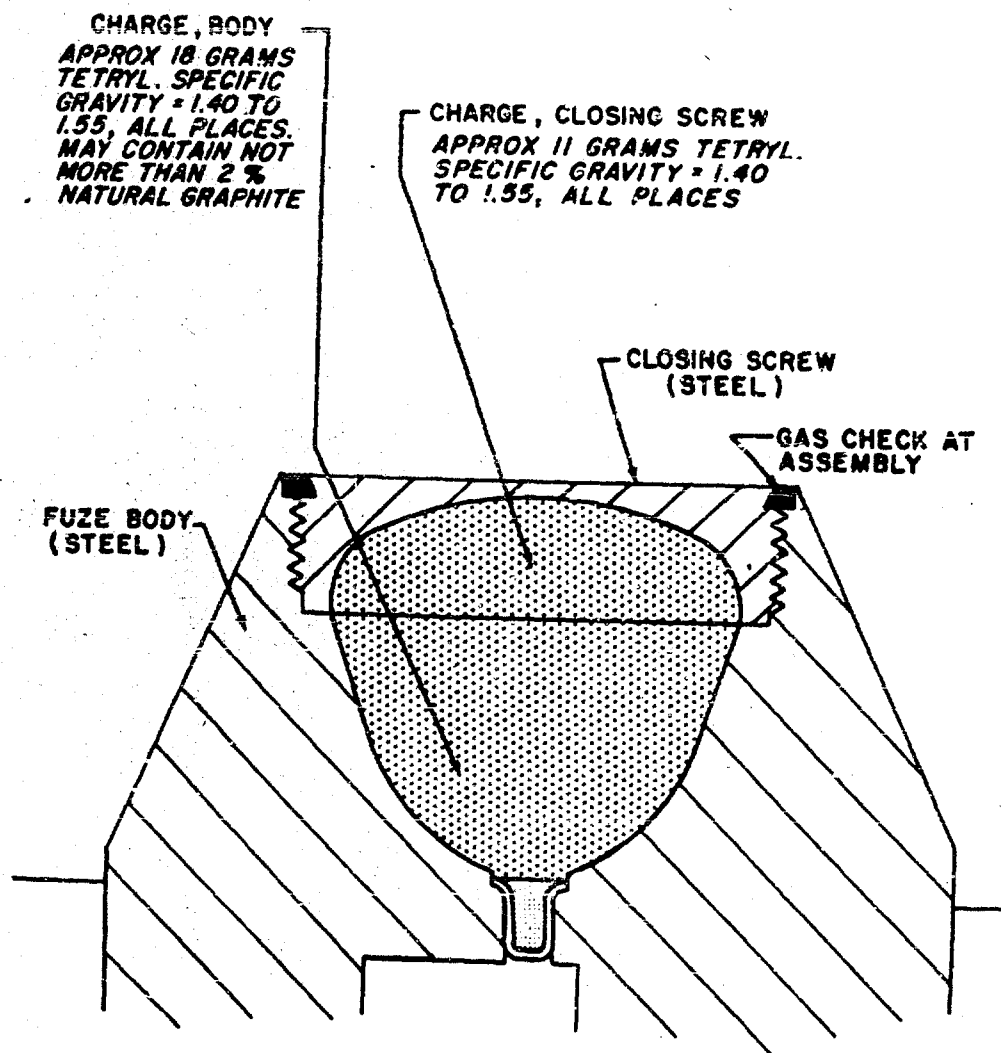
Booster Assembly for Base Detonating Fuze M60 Type.
